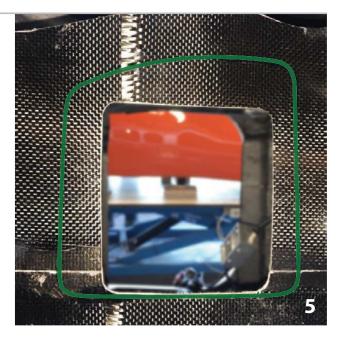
shows the existing and new opening outline. For cutting you can use a Dremel tool or drill holes on each corner and use a hacksaw.
